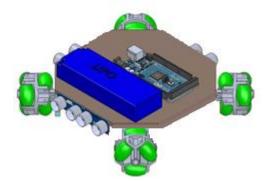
3D CAD Design of the Mobile Robot with Omni Wheels
